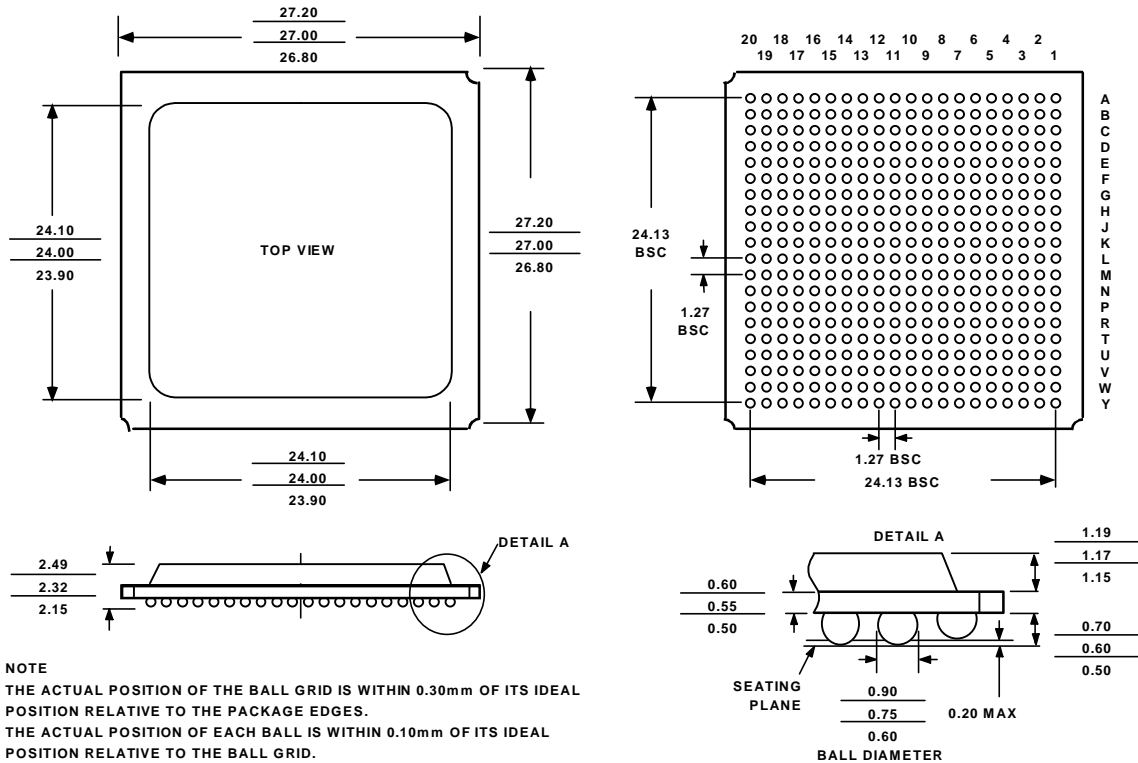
Package Dimensions Metric 27mm × 27mm, 400 ball PBGA
